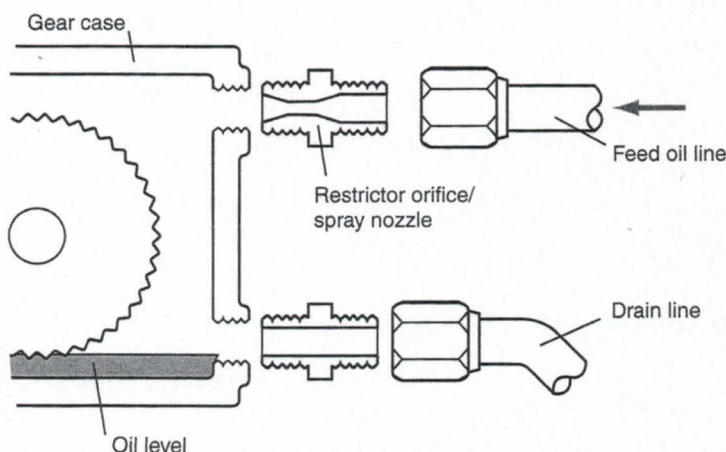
The Autorotor enjoys the option of being pressure-fed with engine oil. An oil-flow metering orifice must be installed at the entry to the supercharger gear case. The gears and bearings are lubricated by splash as the outer edge of the larger gear passes through the sump. Excess oil flows out the drain line and returns to the engine.
